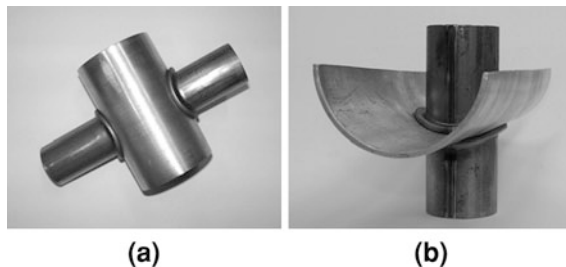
Examples of application of asymmetric compression beads in tube branching by means of the proposed joining technology. a Connection of tubes at nodes in lightweight structural frames and b connection between outlet tubes and half round rain gutters
